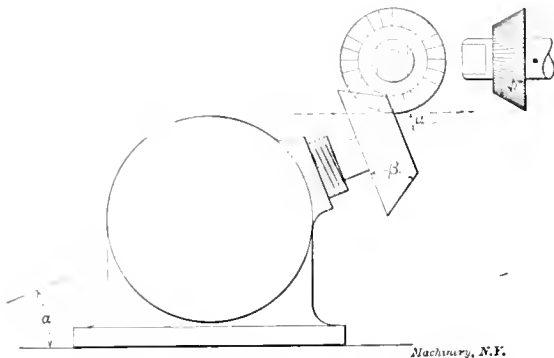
Diagram of Head, Blank, and Cutter for Milling Teeth.
